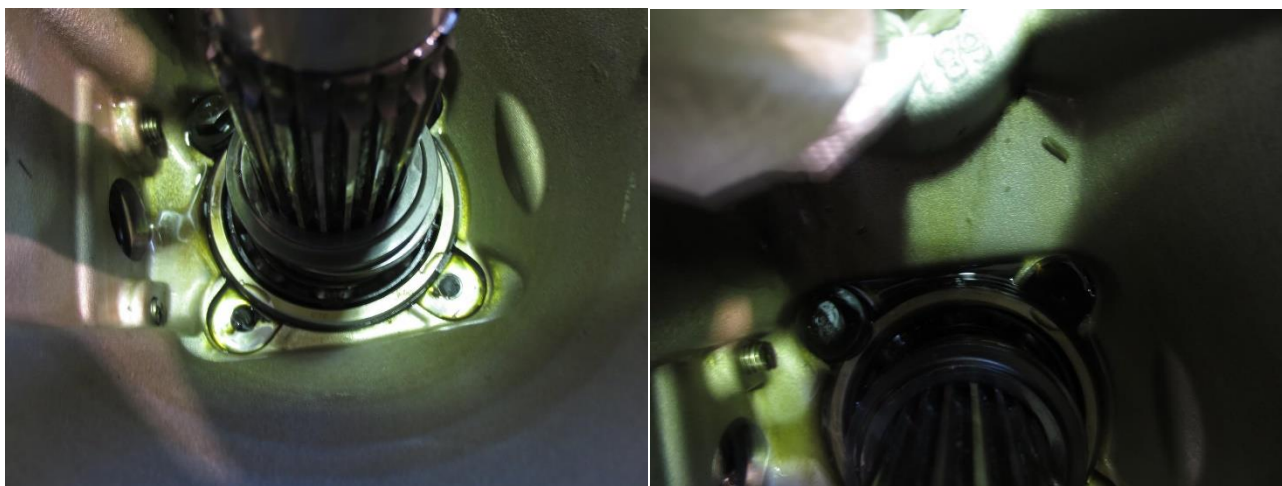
(b).- Propeller hub. Broken bearing to case bolts.
